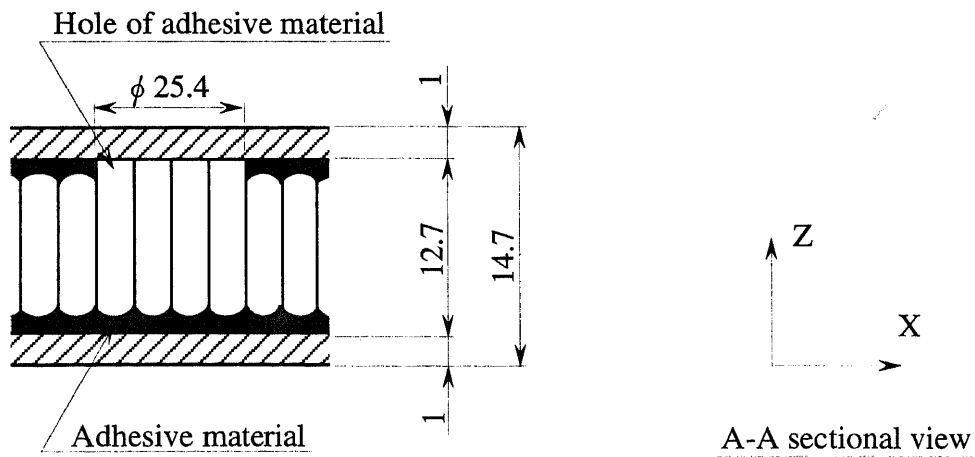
Outline of specimen T-2 (Flaw of adhesive sheet)
